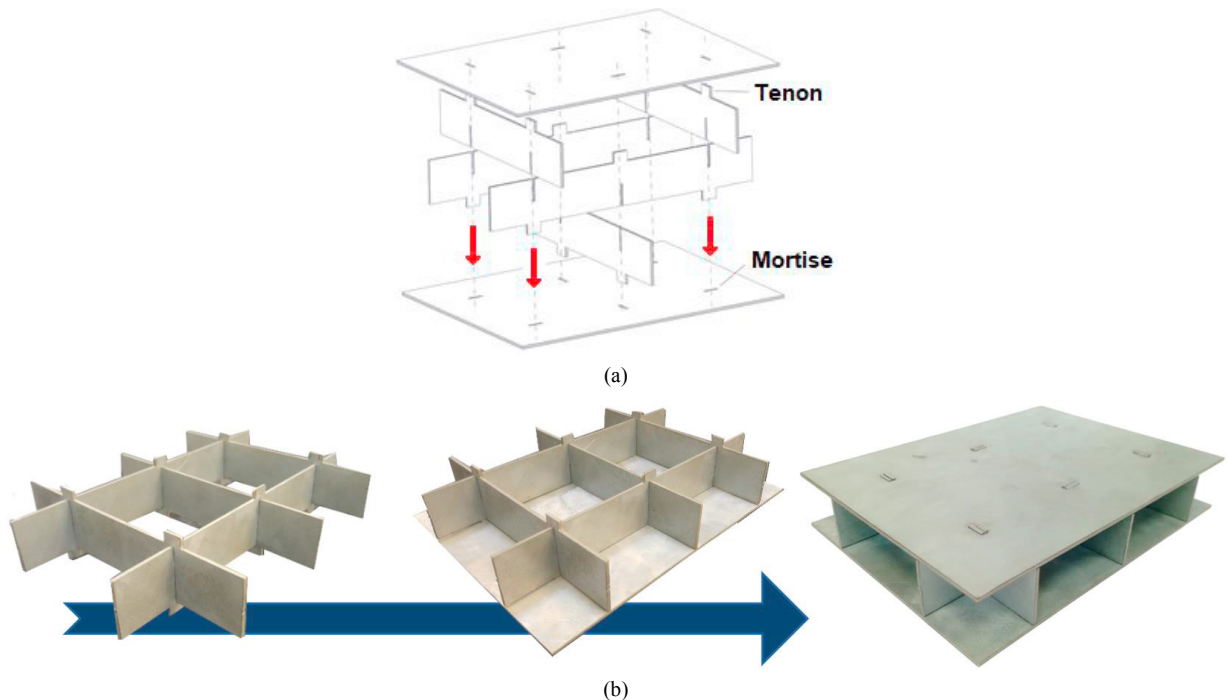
Application of the new joining by forming process to the fabrication of lightweight structural panels. (a) Exploded view of the panel and (b) photographs showing the real panel at different stages of assembly.
